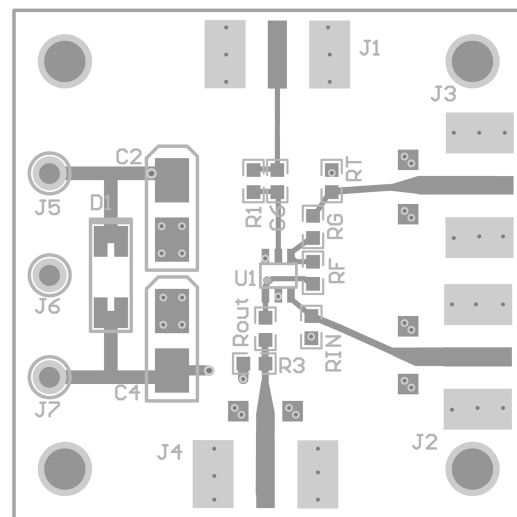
Layer1 Silk (SOT-23 Board Layout)
